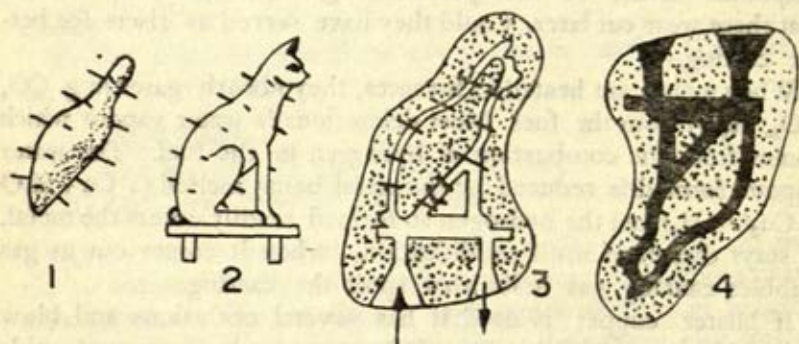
The stages in casting by *cire perdue* (lost wax) method. The wax model (2) of the sculpture is prepared over a clay core (1). The model is again covered with thick clay (3) bearing two holes as inlet and outlet for molten metal. The mould is upturned and filled with molten metal (4) the liquid wax comes out of the outlet as also the surplus metal. The mould is broken when the metal solidifies.
